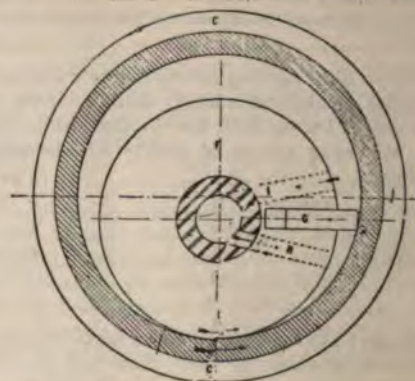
SECTION OF HULT ROTARY ENGINE.
